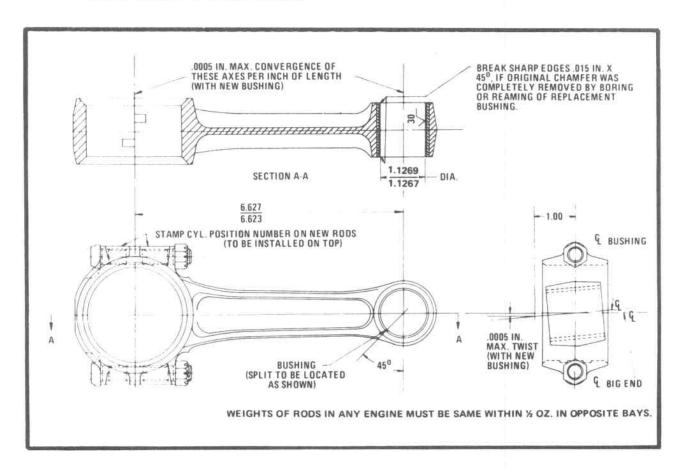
CONNECTION ROD AND BUSHING DIMENSIONS.
